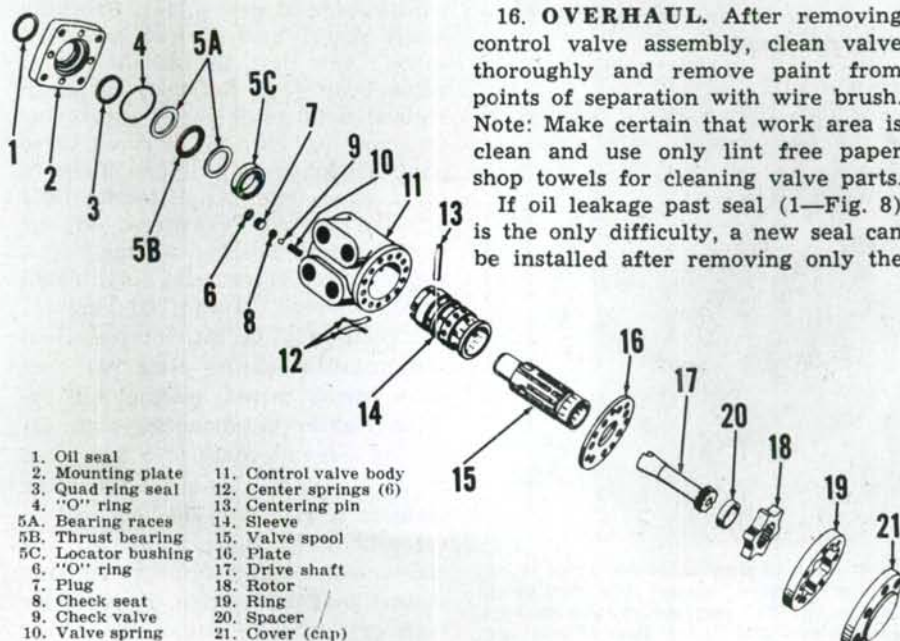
Exploded view of steering control valve assembly. Centering springs (12) are installed in two groups of three springs with arch in each group back-to-back.
